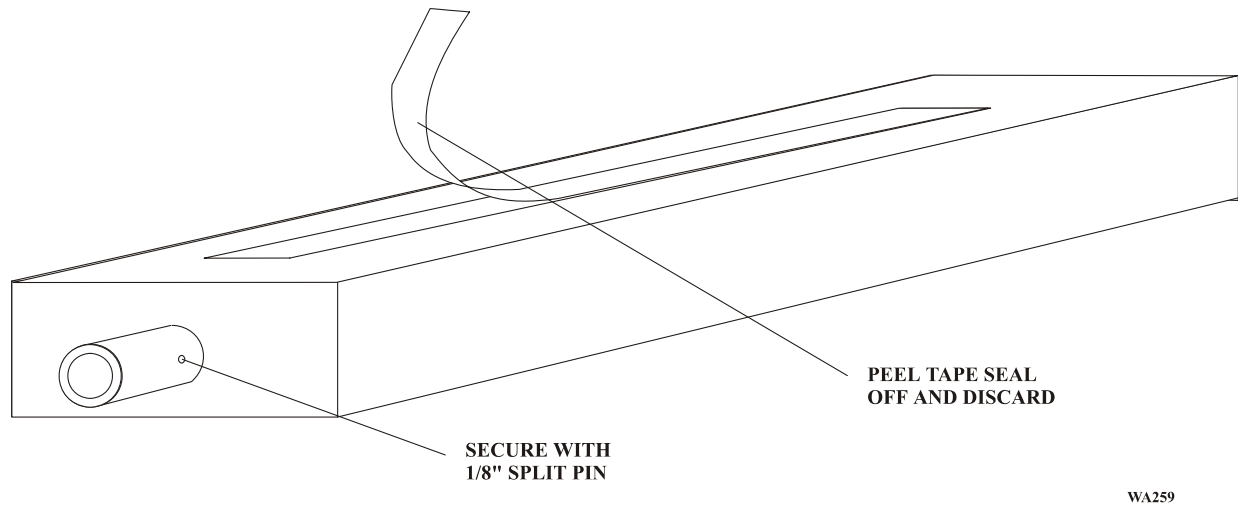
Motorized Hydraulic Pump Replacement,
